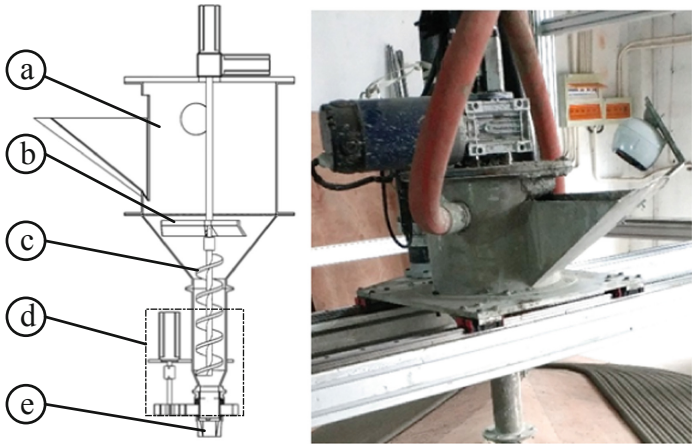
Extrusion subsystem. (a) Material hopper; (b) Mixing blades; (c) Screw; (d) Rotating mechanism; (e) Nozzle.
